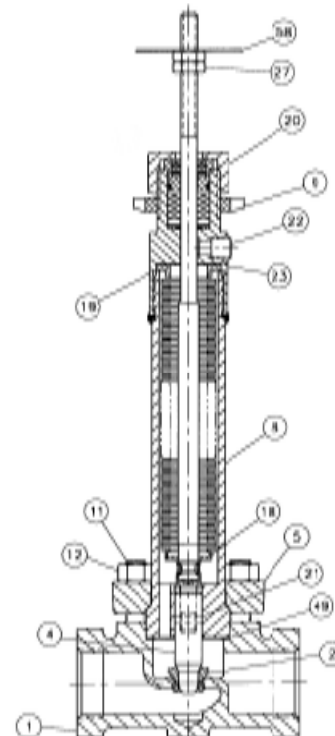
Valve Body Assembly with NOLEEK Bonnet(representative illustration)
